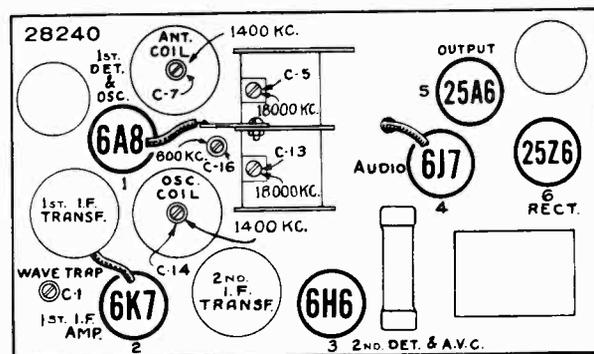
Radiotron, Coil and Trimmer Locations — R. F. Trimmer Adjustment
